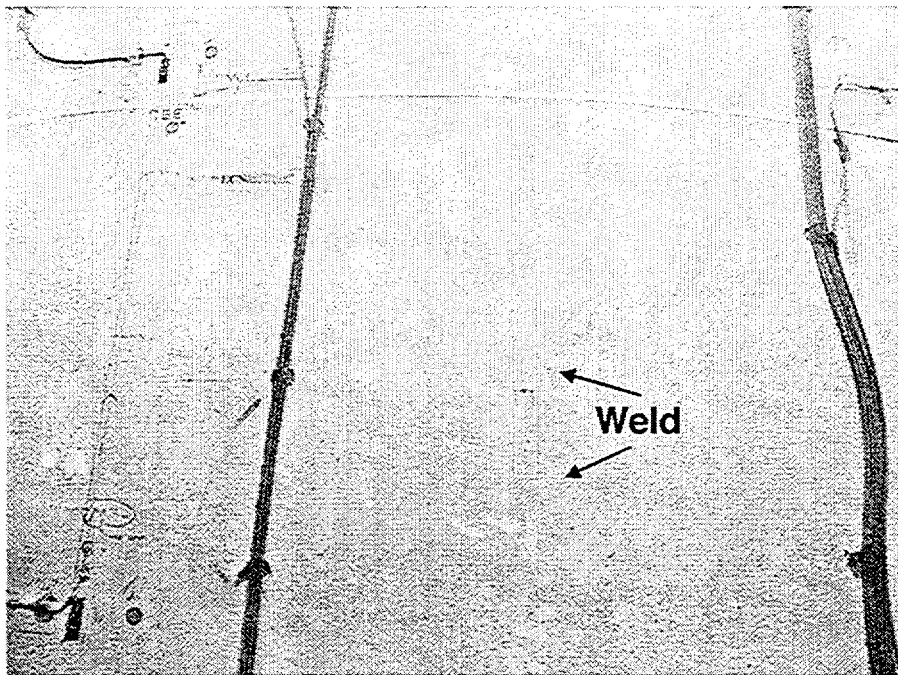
Exterior view of stretched paint coating along vertical weld seam in lower conical shell section.
